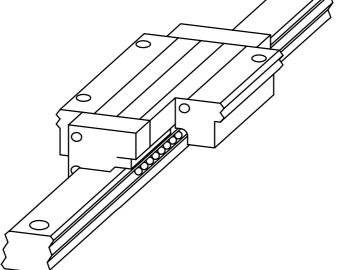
Recirculating linear ball [roller] bearing, linear guideway type
